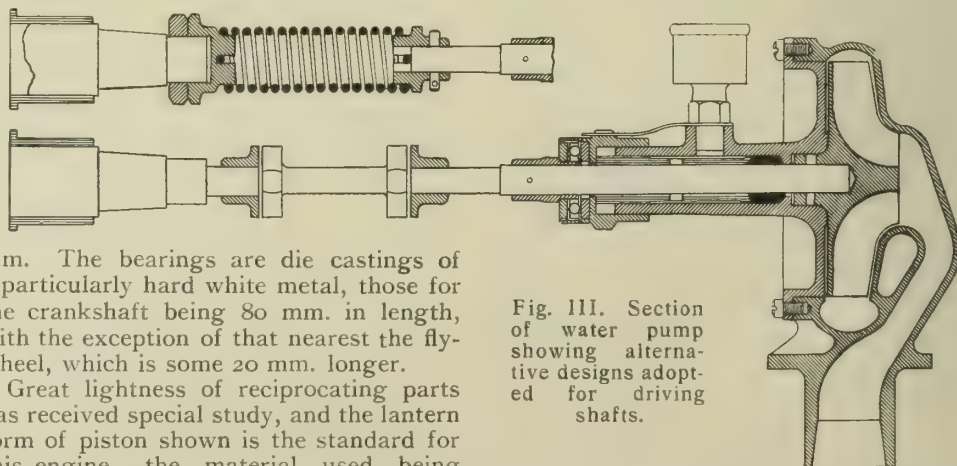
Fig. III. Section of water pump showing alternative designs adopted for driving shafts.
